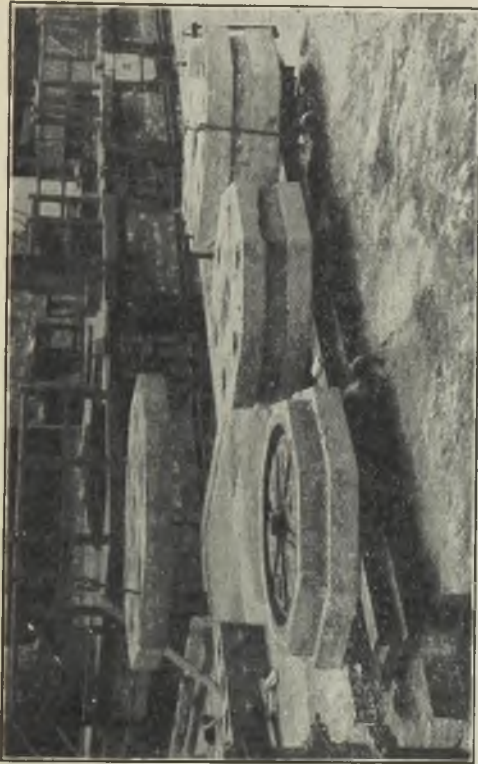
SHOWING METHOD OF CLAMPING ONE TYPE OF MOULD.
